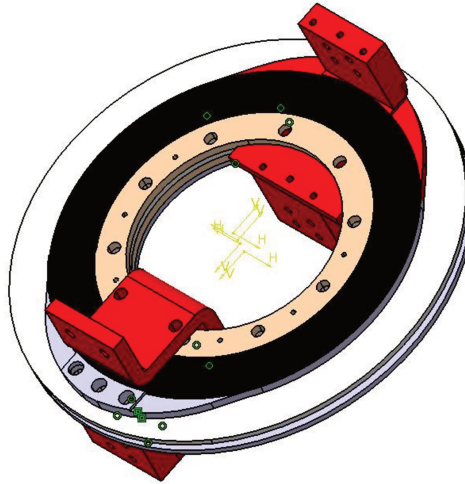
A Computer Assisted Design view of the prototype double-pancake. The top flange is missing. The winding is represented in black. The copper pieces are in red. Other pieces are made of G-11.
